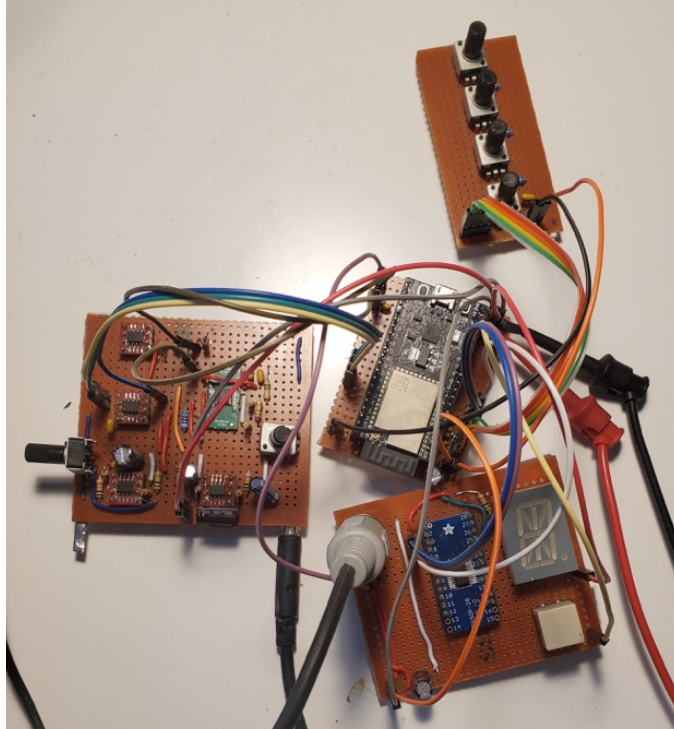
FINAL PERF BOARD ASSEMBLY
